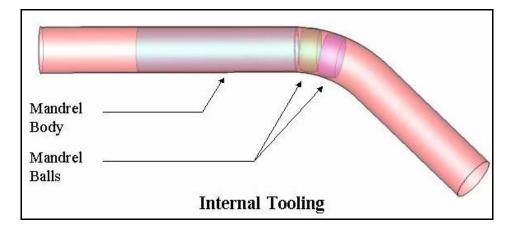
Internal tooling for Rotary Draw Tube bending [3]
